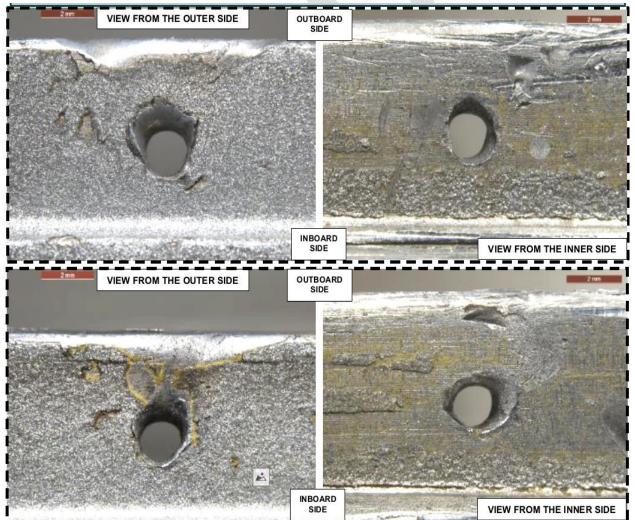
Details of the large worn areas visible at the edges of the support bearing sleeve assembly holes for fixing the locking wires, at their sides and at the support bearing outboard edge.
